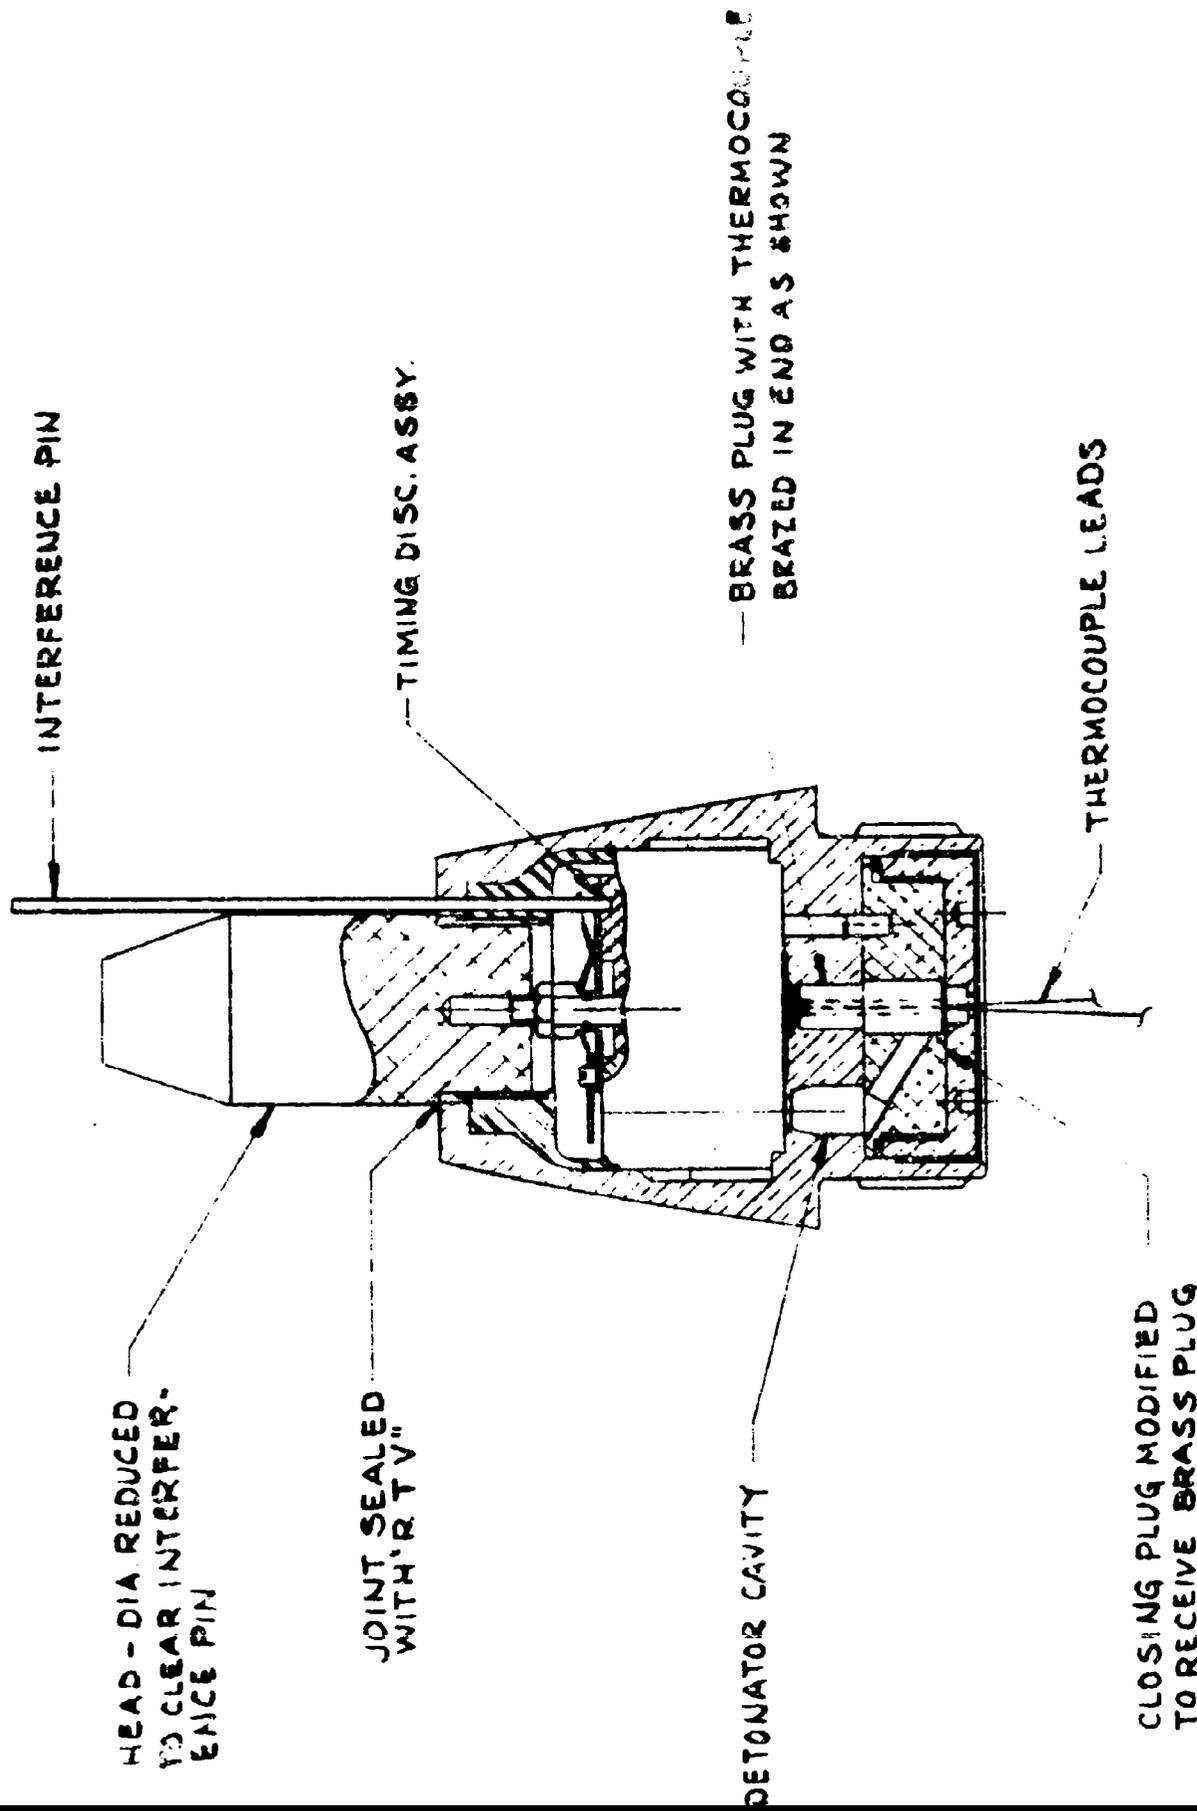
shows the detonator holding and actuating fixture used to test detonator and detonator-lead combination.
